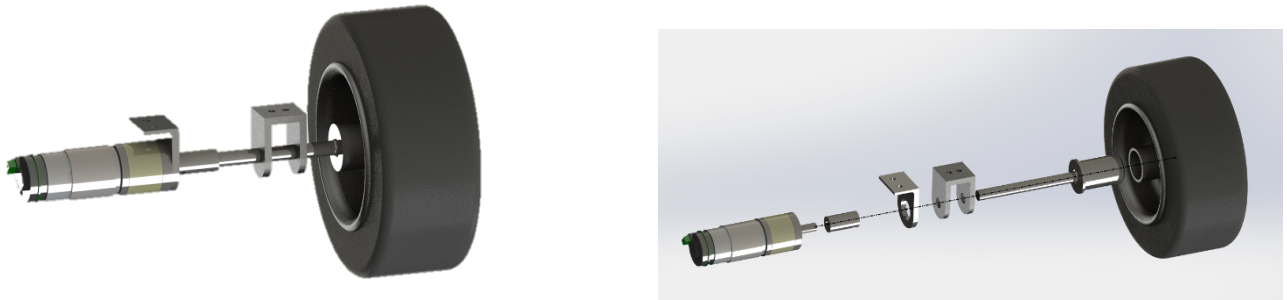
Assembly for drivetrain (left) and exploded view (right)
